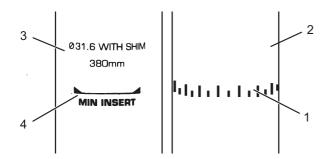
Detailed view of the seat post – examples of the minimum insertion depth marking
